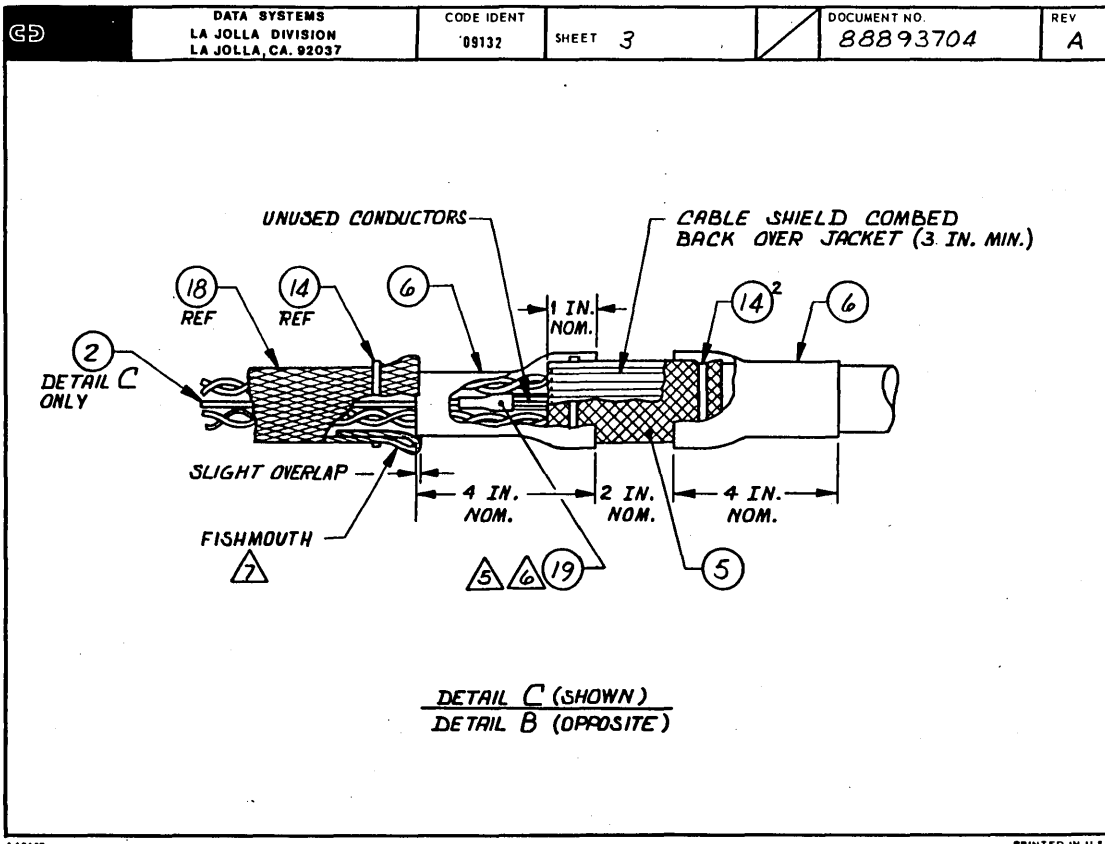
Cable Assembly - Bus Out Expansion (Sheet 2 of 5)
